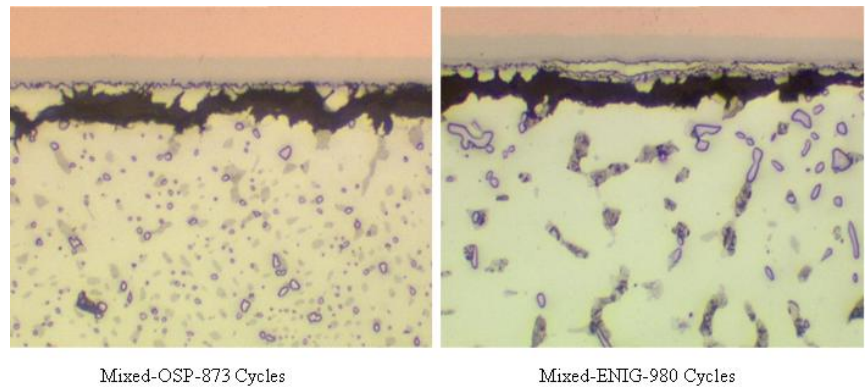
Photographs showing the failure modes observed on the mixed solder joints for the CTBGA132 package assembled on OSP and ENIG finished PCBs.
